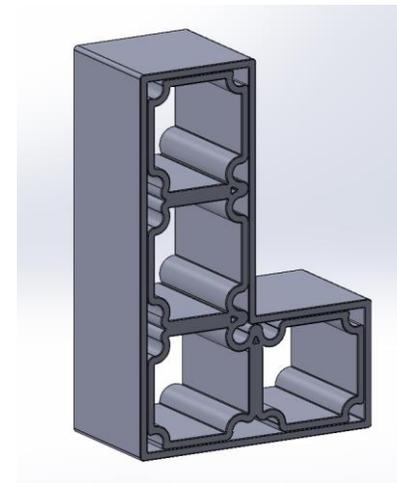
Design of the 3D-printed L-shape Geobam Play Block
